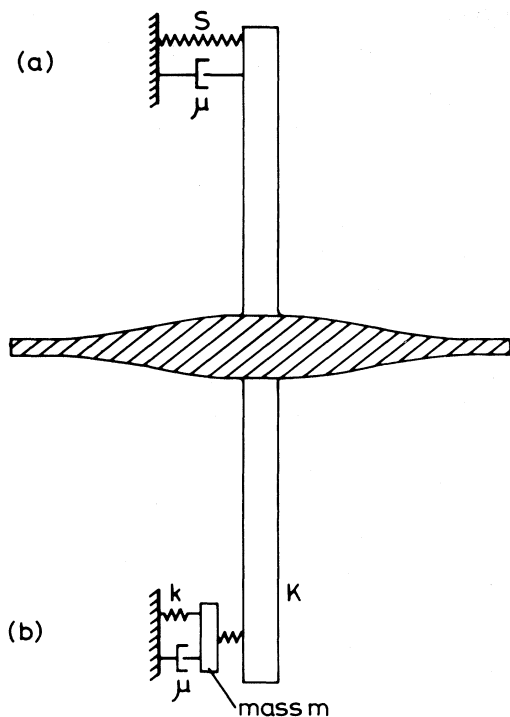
De Laval turbine disc on flexible support: (a) direct support to earth, using the flexible shaft in series with a flexible damped lubricant film in a journal bearing; (b) indirect damping, using flexibly mounted bearings.
